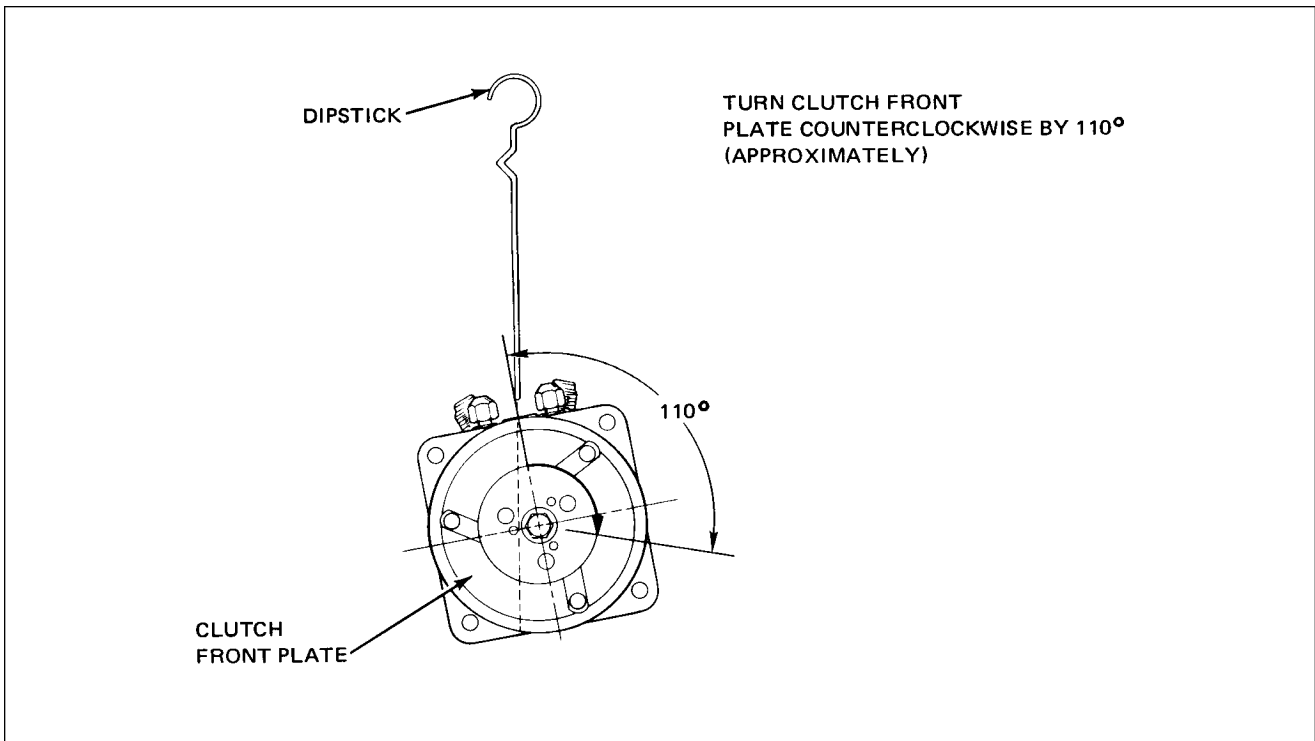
Rotation of Clutch Front Plate (Sankyo Compressor Oil Check)
